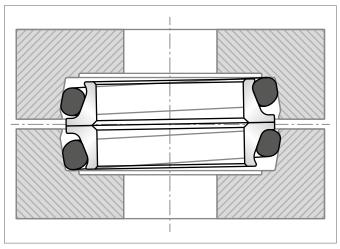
0-Rings slipped against seats and Mechanical Face Seal group is tilted
